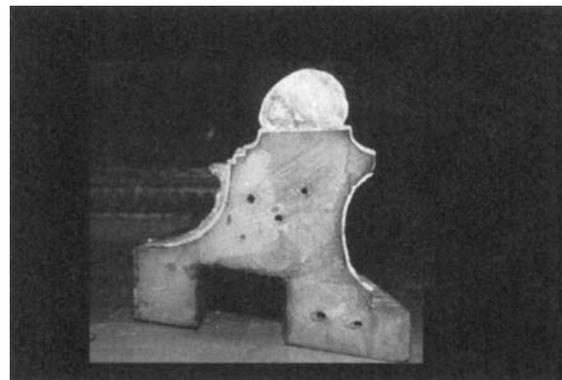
An opened miter corner of an outer profile with a box section back recess and laminated four-part construction.
